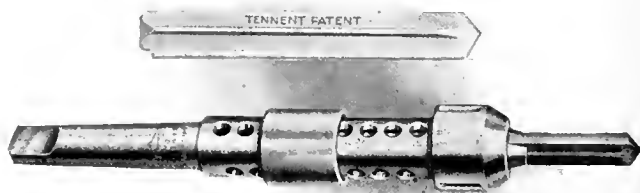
The "Economy" Flat Drill and the Chuck for Holding it.
